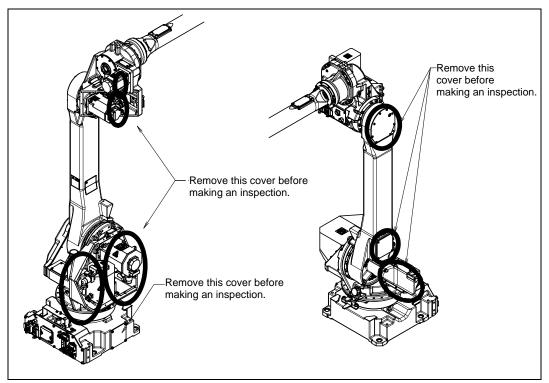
(a) Inspection points of the mechanical unit cables
